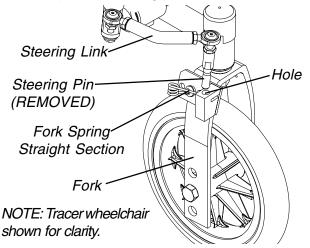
CONNECTING/REMOVING STEERING LINK TO/FROM FORK
